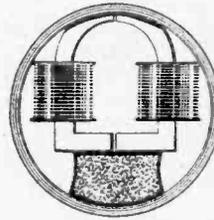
(Above).—Plan view of head held within housing by rubber edge.
